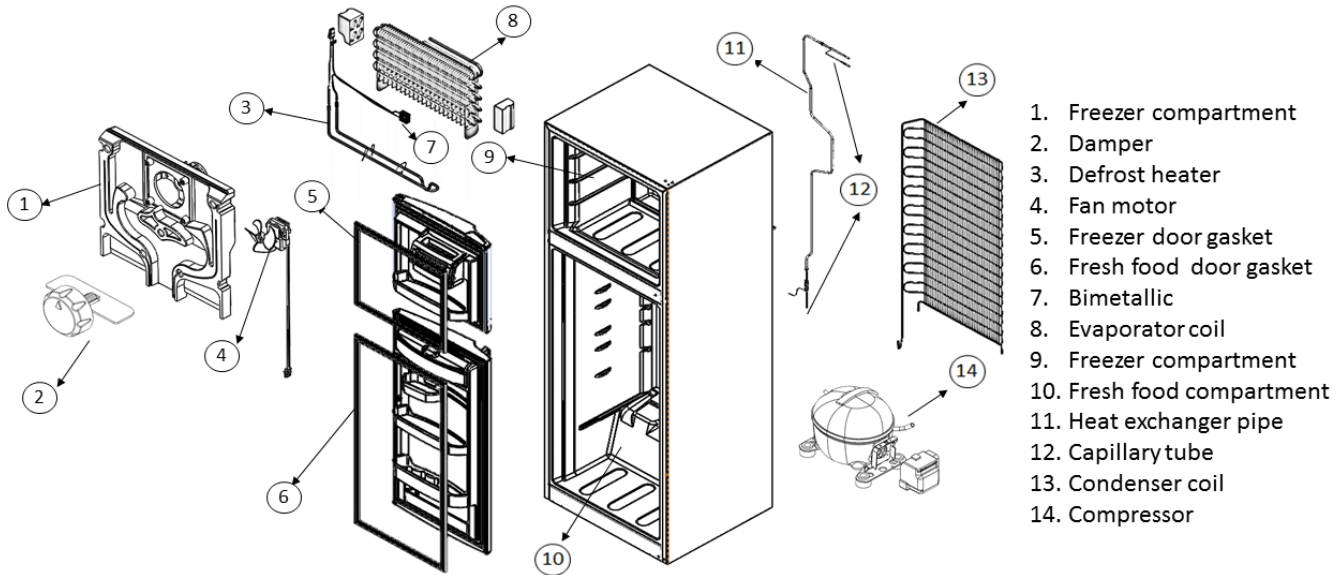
Description of a refrigerator produced by local partner since 2012.
